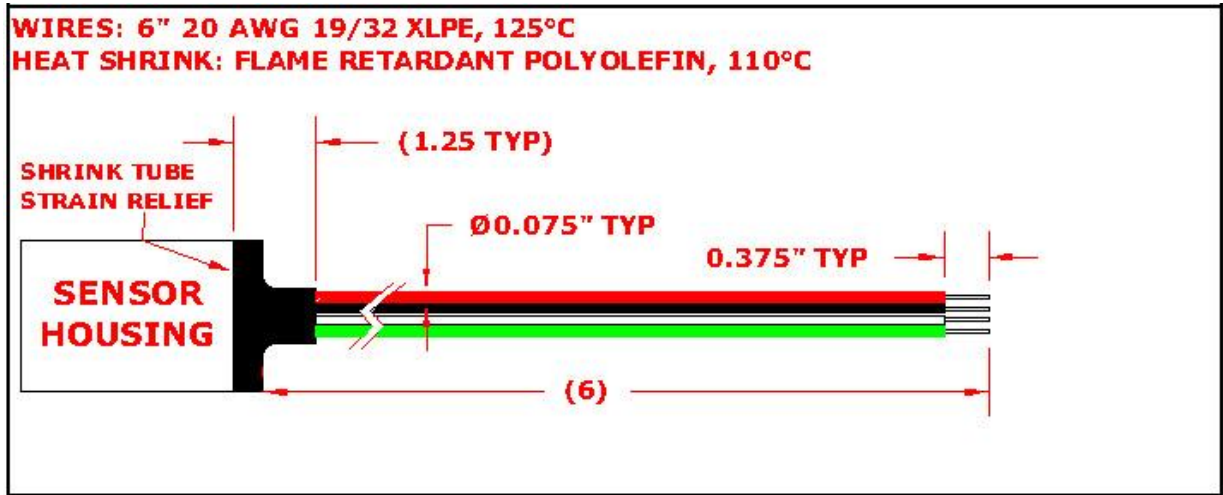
Sensor Wires Drawing (Dimensions in inches)
